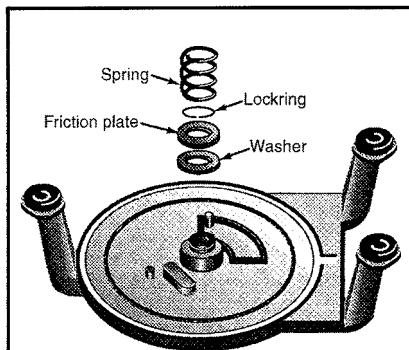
The friction plates (lower not pictured) and spring washer are secured using the pulley locking
